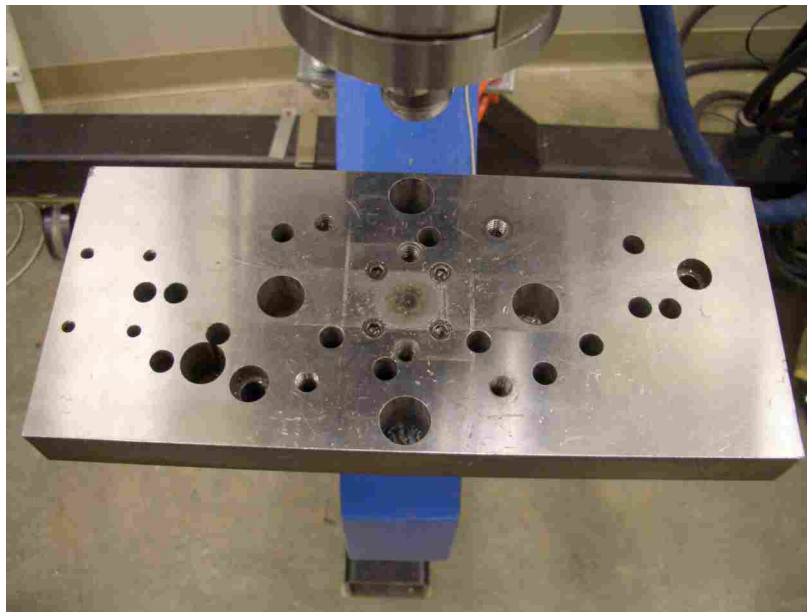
Fixture platform used to secure samples for welding
